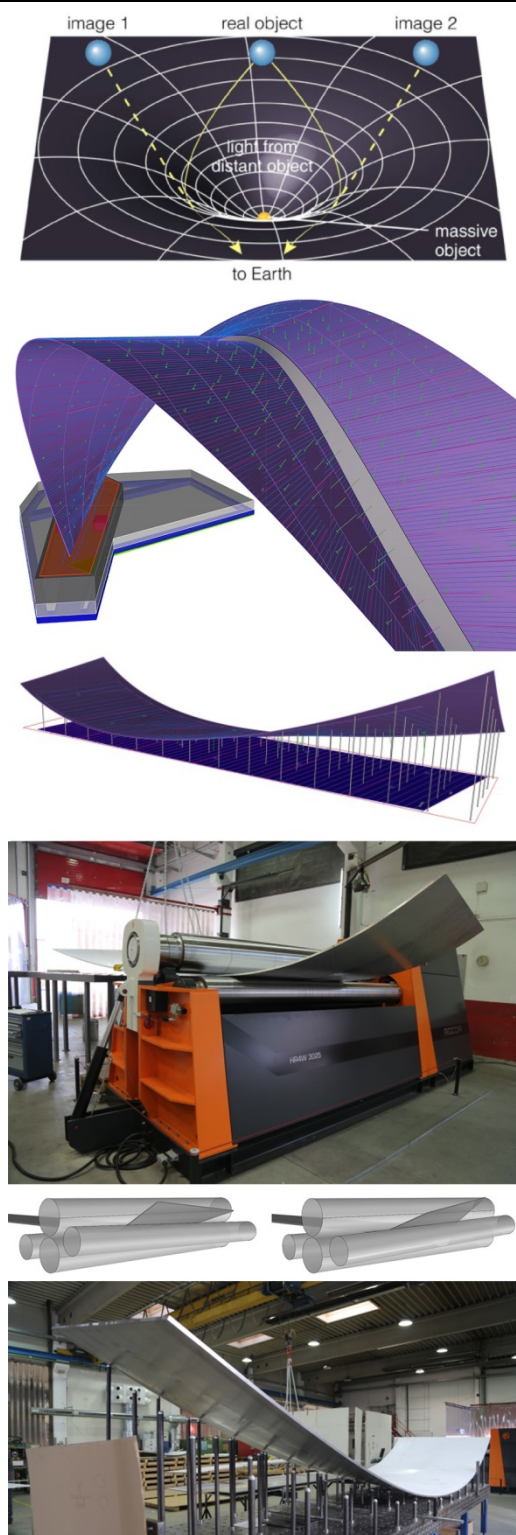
From top to bottom - a) Geodesic path of light in a gravitational field, b) Plate subdivisions of the geometry with the pins and roll axes, c) 3D surface and the unrolled surface for bending information and cross-check, d) Rolling Machine, e) Rolling process, f) Plate geometry check.
